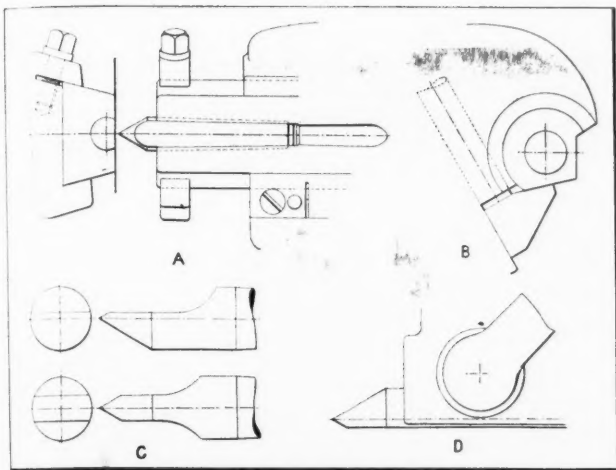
(A) Flat-faced Spindle and Center of Automatic Lathe; (B) Center used on "Lo-swing" Lathe; (C) Cut-away Centers; (D) Flat-faced Pipe Footstock
